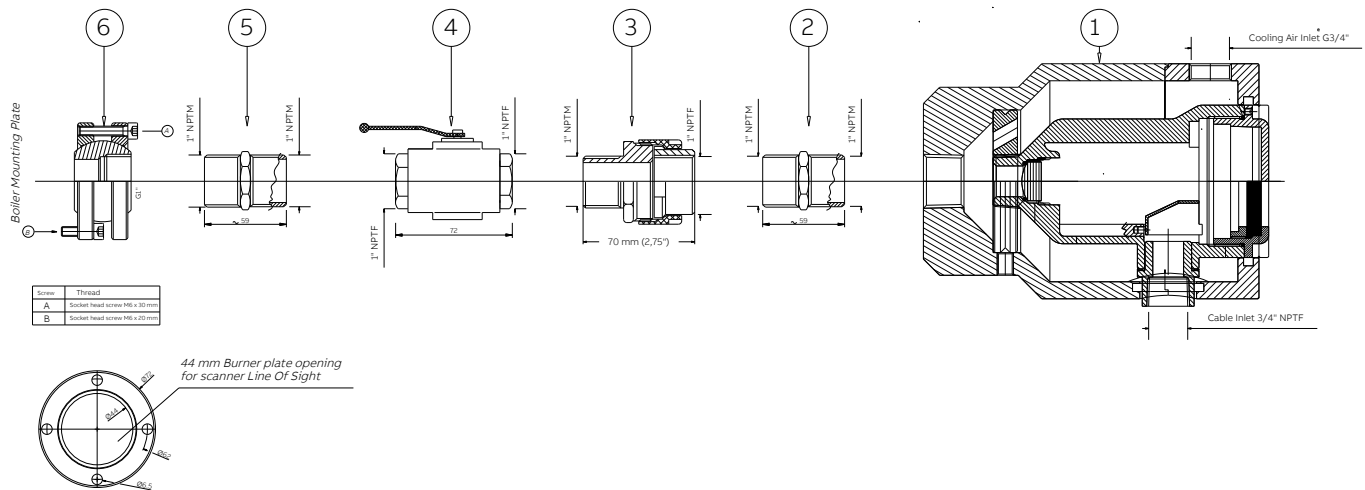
SF810 assembly layout with cooling cylinder and fitting.
